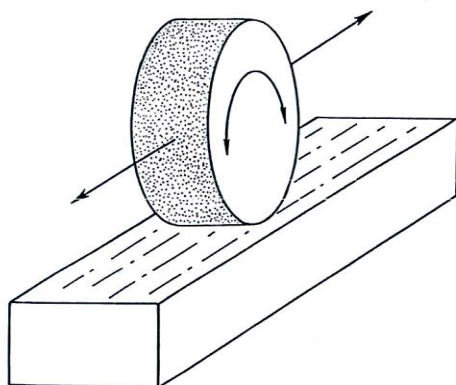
Surface Grinding Parallel to the Specimen Longitudinal Axis
